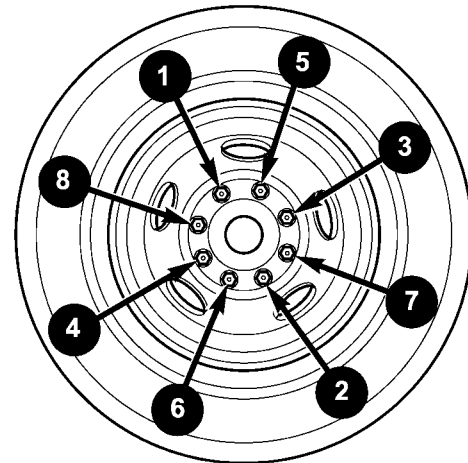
WHEEL INSTALLATION 8-LUG SHOWN
